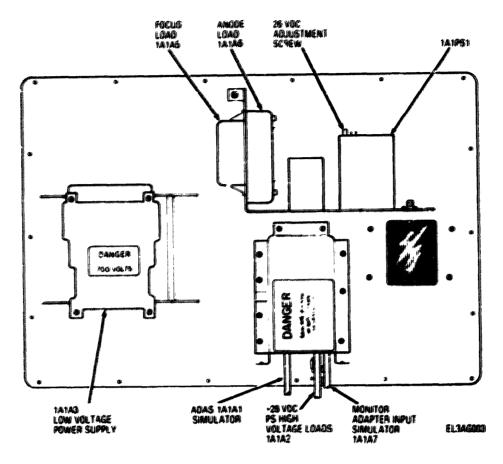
Test Set Subassembly MX-8638A/APS-94D, 1A1, rear chassis view, parts location.
